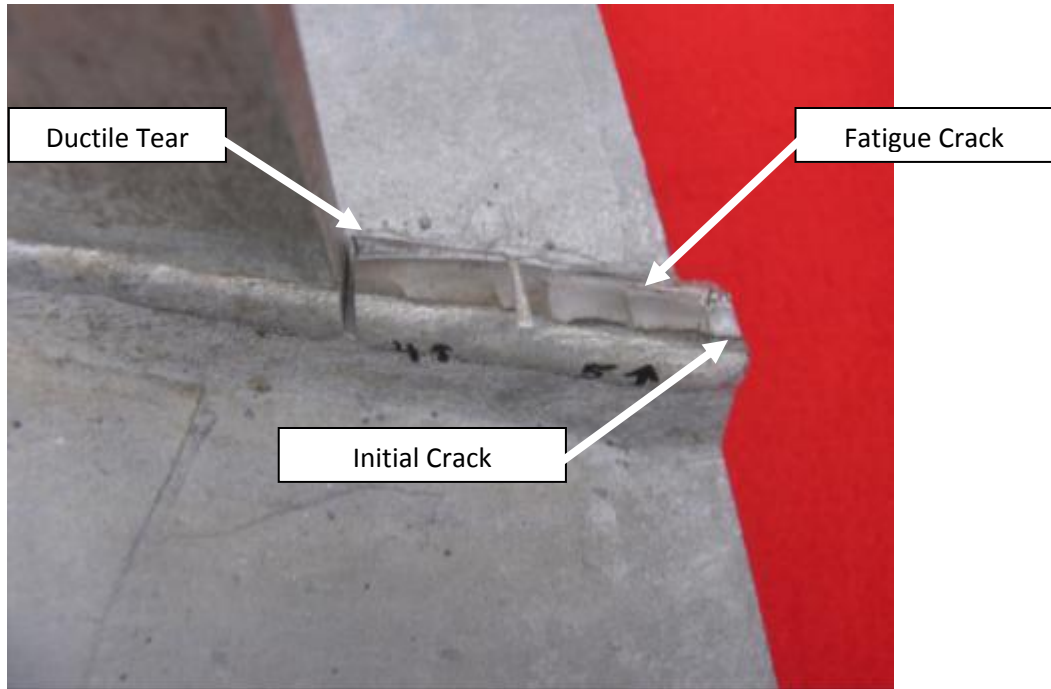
Close Up of Fracture Surface at Bend 5
